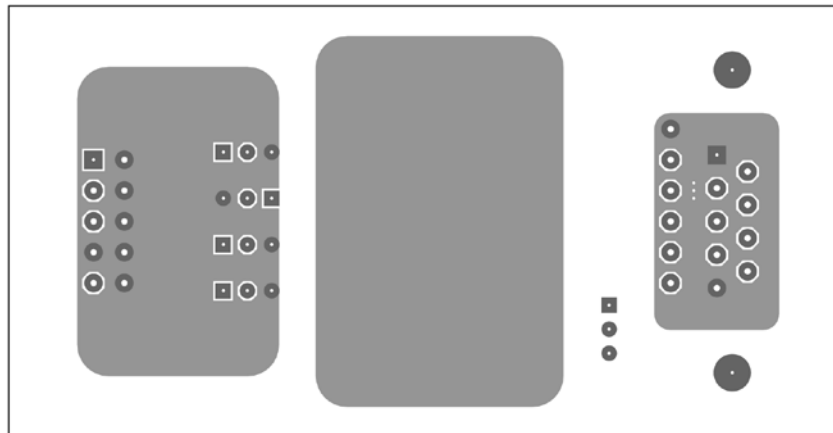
Low EMI Demo Board Layout (DC1746A), Inner Layer 1
